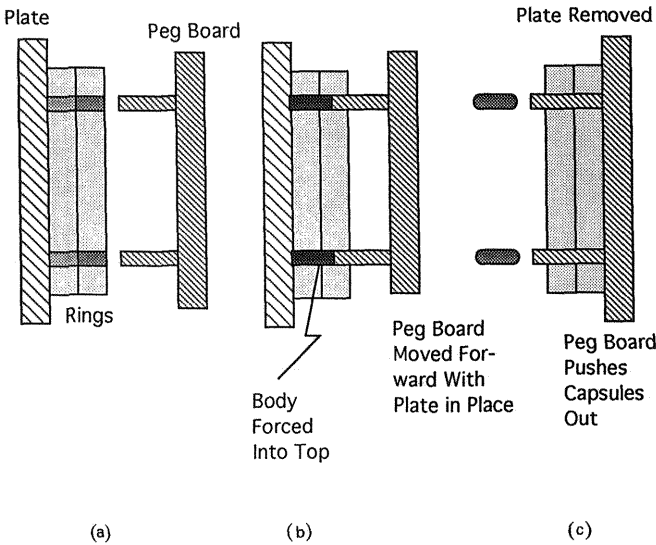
Principle of ejection of capsules in a two-ring machine.
